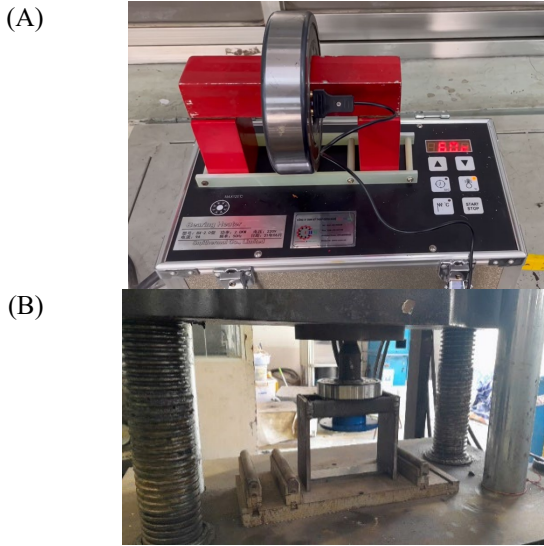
(A) Assembly of bearing by heating method and (B) Hydraulic press bearing removal.
